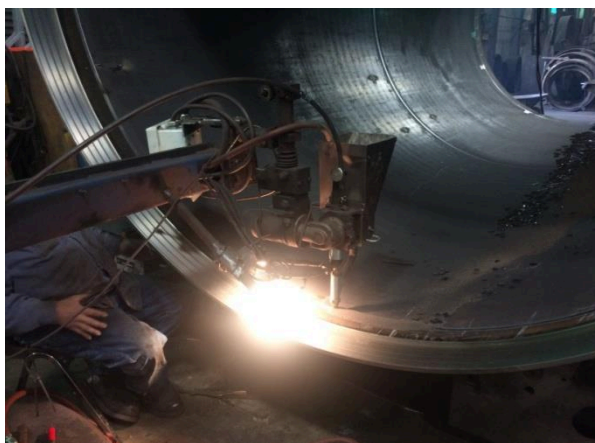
Butt Weld Permalok Joint To Pipe
